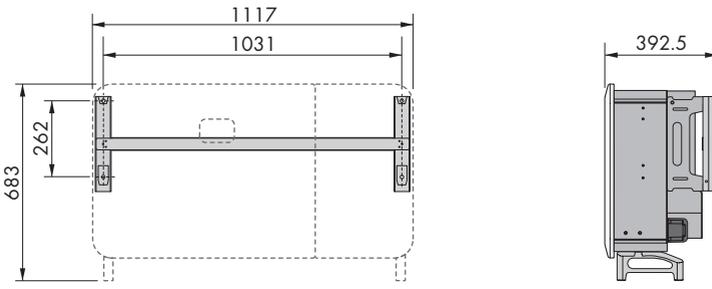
Dimensions of the mounting bracket (dimensions in mm)
